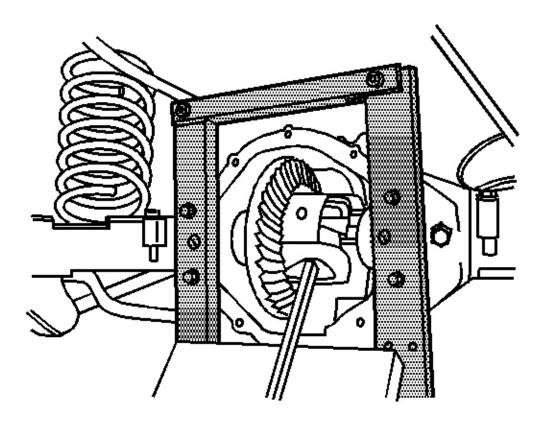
View Of J 45222 Courtesy of GENERAL MOTORS CORP.
